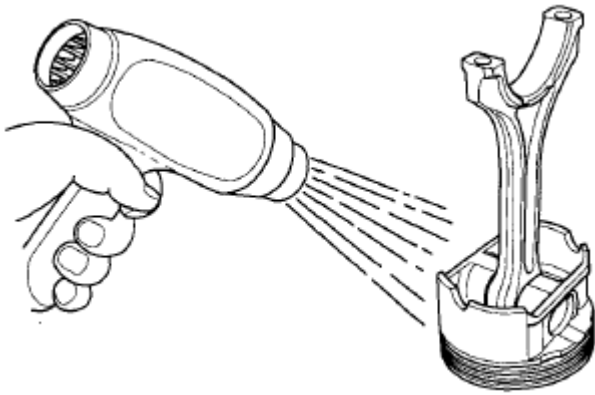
Removing Piston Pin To Separate Heat On Each Piston And Connecting Rod Assembly
